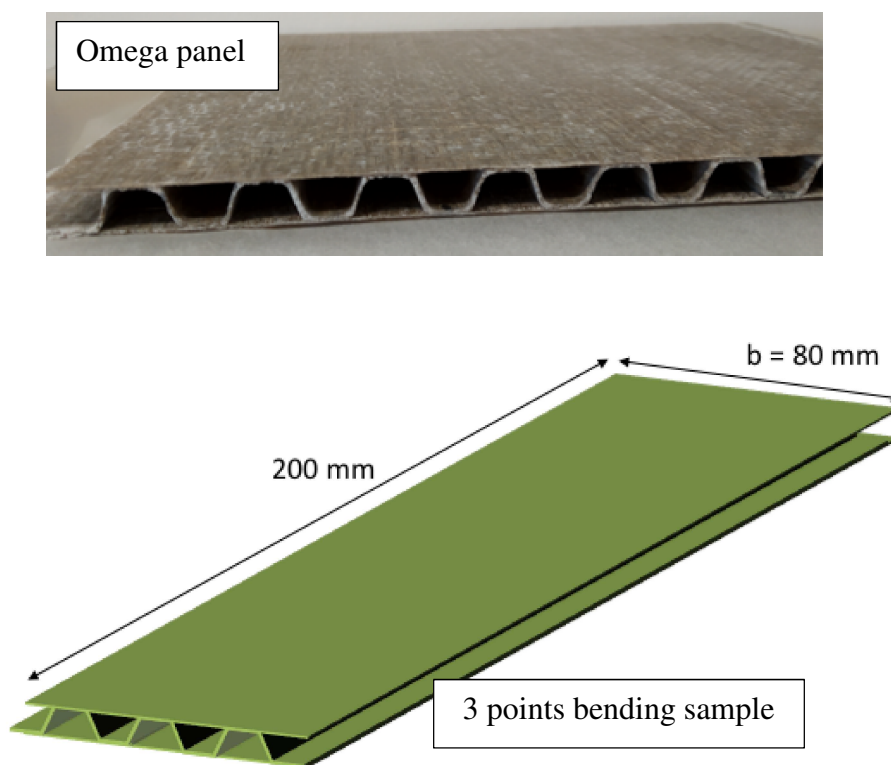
Flax fibres Omega panels and 3 points bending specimen dimensions
